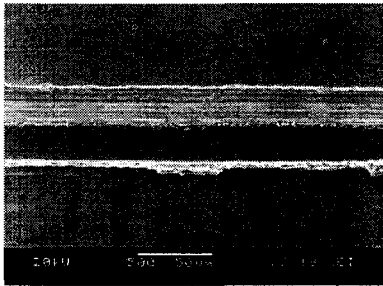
Groove machined with a rectangular tool: 6000 rpm, 5 μm feed, and 2 μm depth of cut
